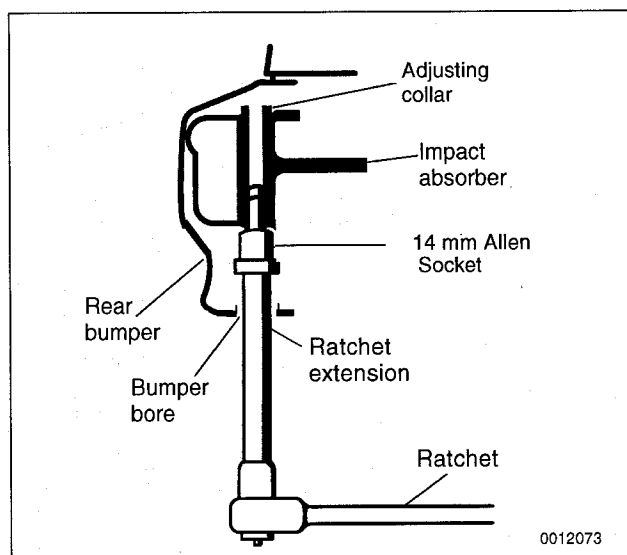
Adjust bumper height at threaded adjusting collar in bumper impact absorber.
